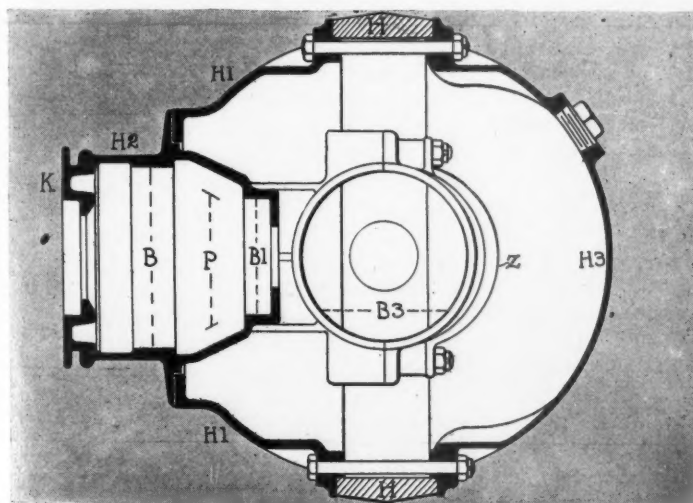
BEARING SUPPORT IN ALCO REAR AXLE
